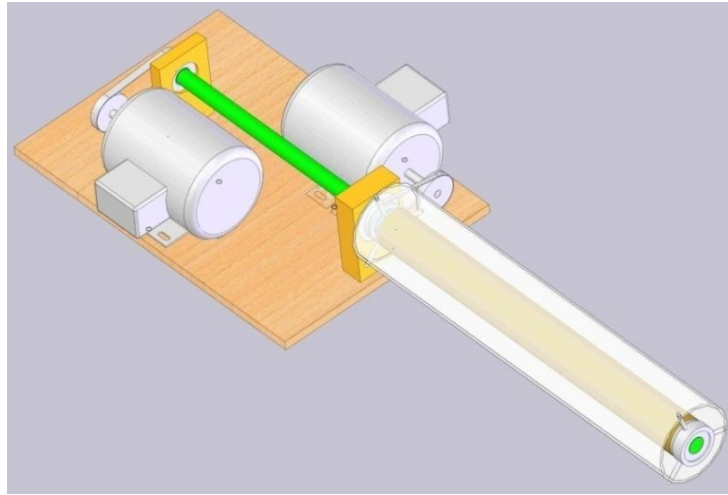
Isometric view of the concentric rotating cylinder assembly.
